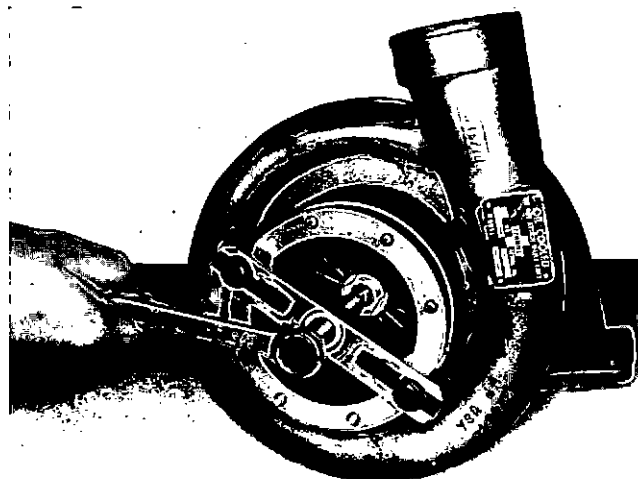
, (VTST28). Removing the compressor wheel, housing and diffuser plate
